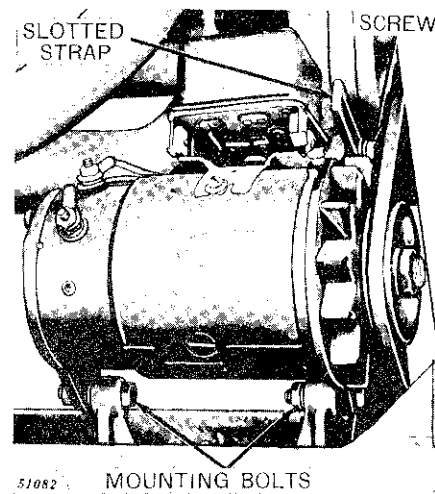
Generator Mounting Bolts and Strap Cap Screw for Belt Adjustment
